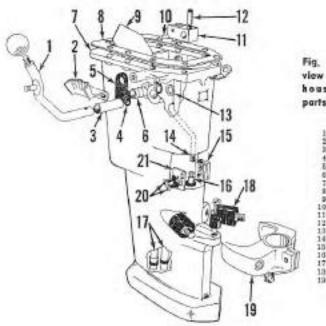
Exploded view of lower motor housing and associated parts used on Fleet Scott models.
